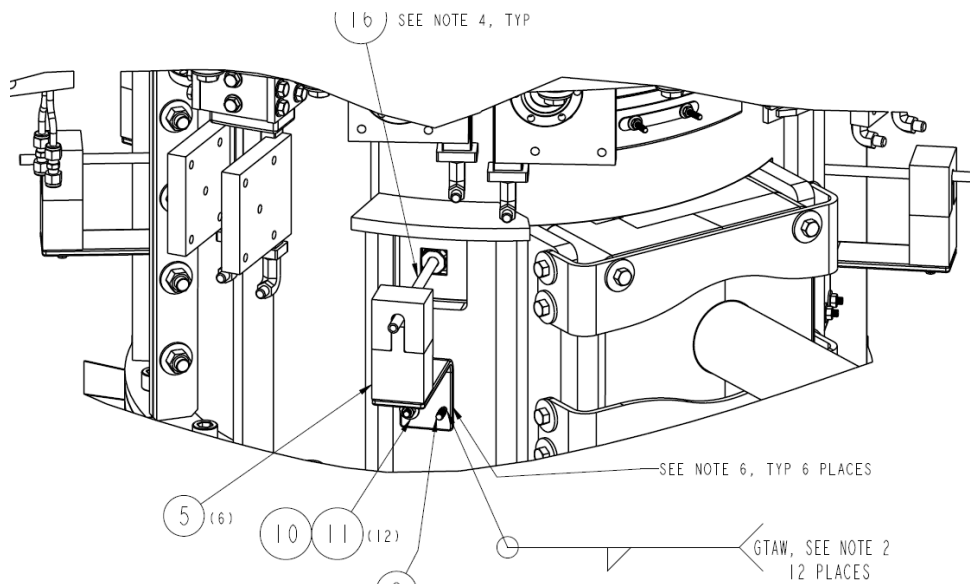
2EDC1944 Cooling Water Tube Support (Lower Details)
